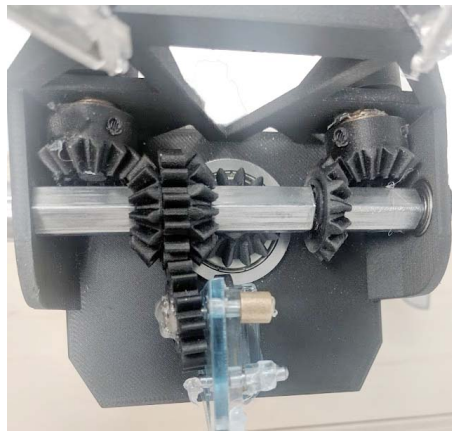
Bevel gear transmission with e-clips, press-fit bearings, and spring pins
